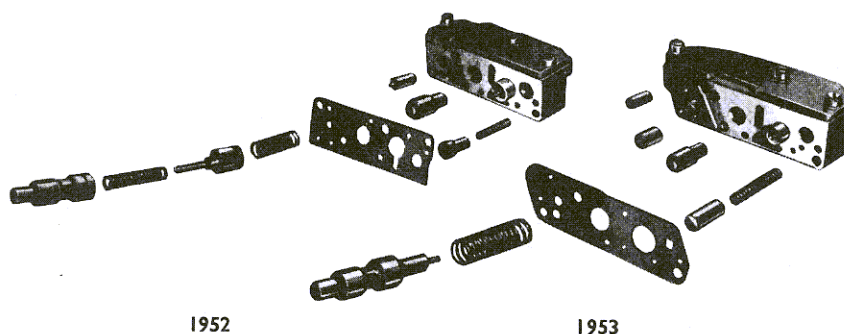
Front body and valves, oil guide plates and 3-4 shift valve groups
